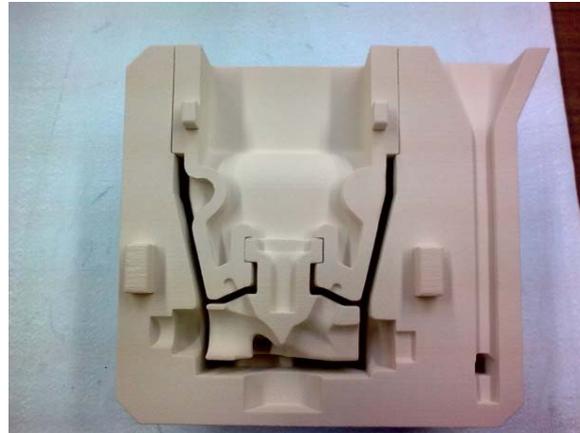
Half assembled mould showing coolant chamber and top chamber cores, the pouring basin, the sprue and the runner entrance
